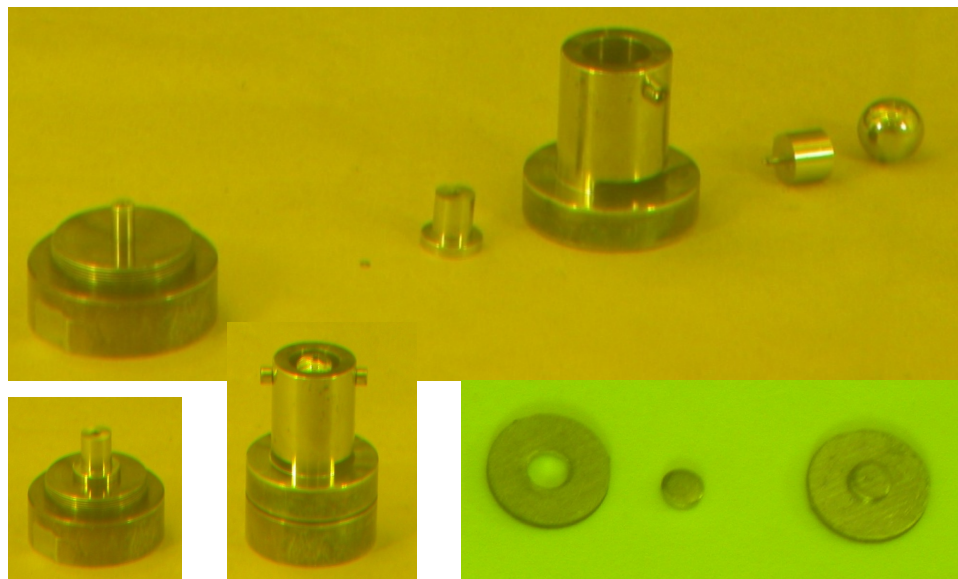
Images of Shear Punch Test fixture for 3mm x 0.25mm TEM samples using a 1mm punch.
